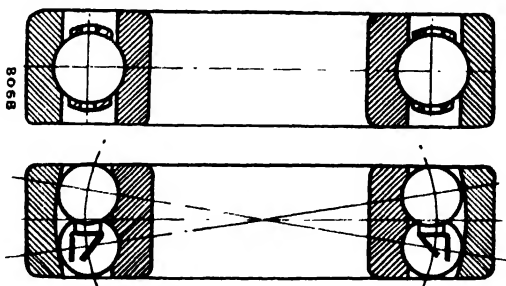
Single row radial ball bearings, self-aligning and fixed
